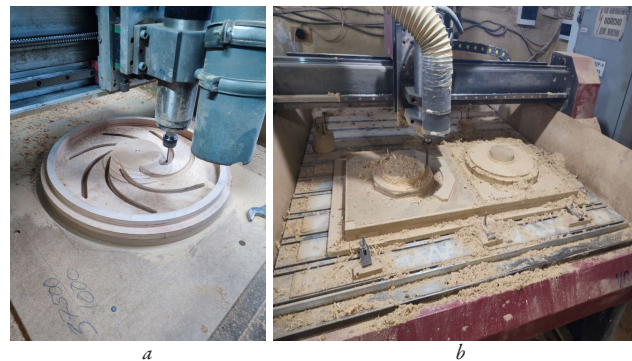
The milling of the elements of the model tooling on a three-axis CNC machine: *a* – finishing of the impeller core box; *b* – roughing of the model of the top and bottom of the impeller
